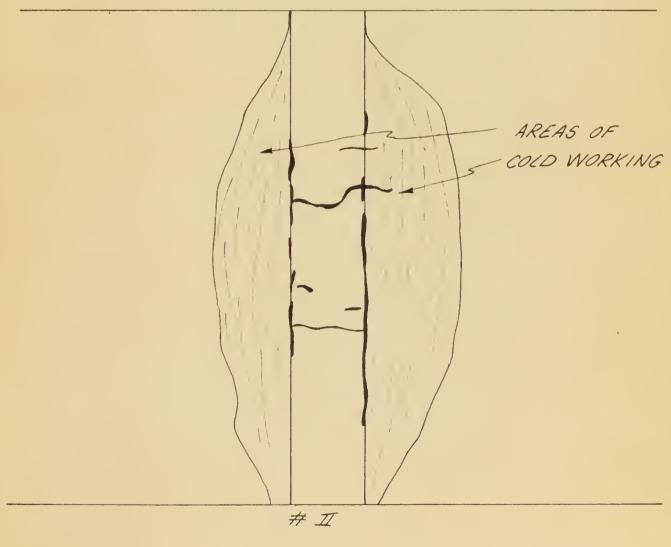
SKETCHES OF BREAKS IN WELDS
